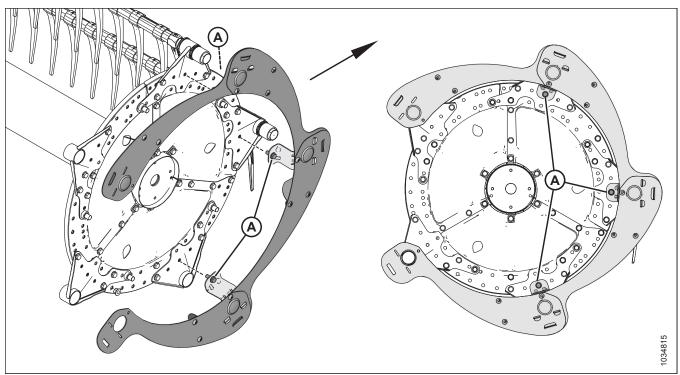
Five-Bat Reel – Partially Assembled Reel Endshields on Reel
